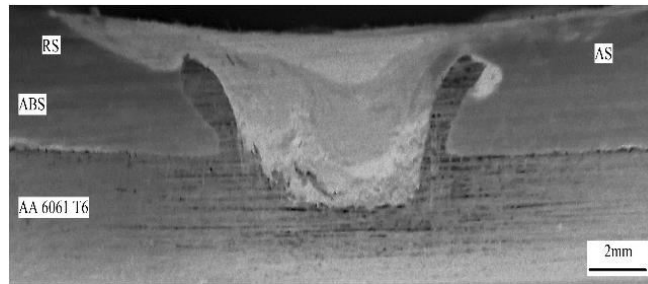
Cross-sectional view of joint welded at 710 rpm tool rotation, 14 mm/min feed rate and 20 mm shoulder diameter.
